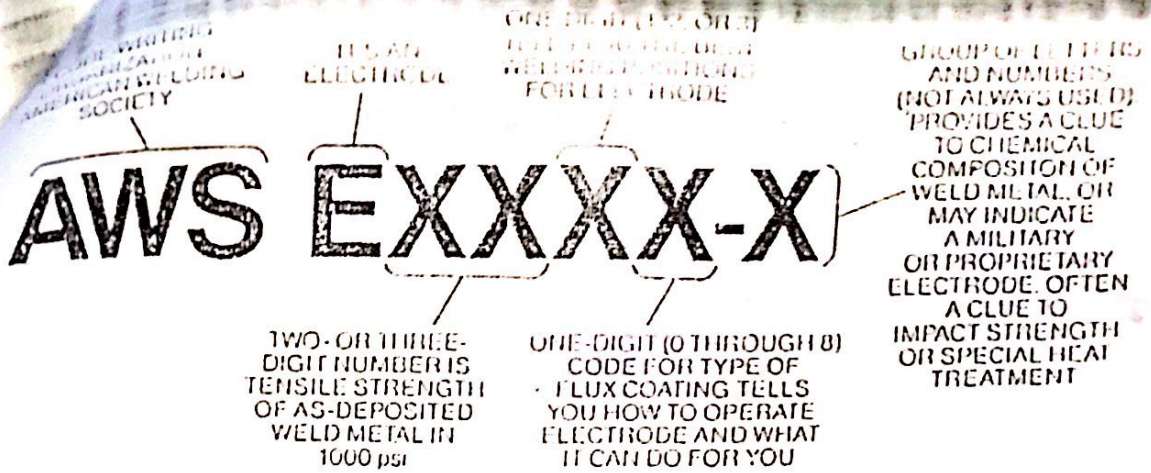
The American Welding Society filler-metal code for carbon steel and low-alloy steel-coated electrodes. Learn to read the code. Every arc welder should be able to look at the code printed on the electrode-holder end of a stick electrode and immediately know a great deal about the weld metal that the electrode will produce.
